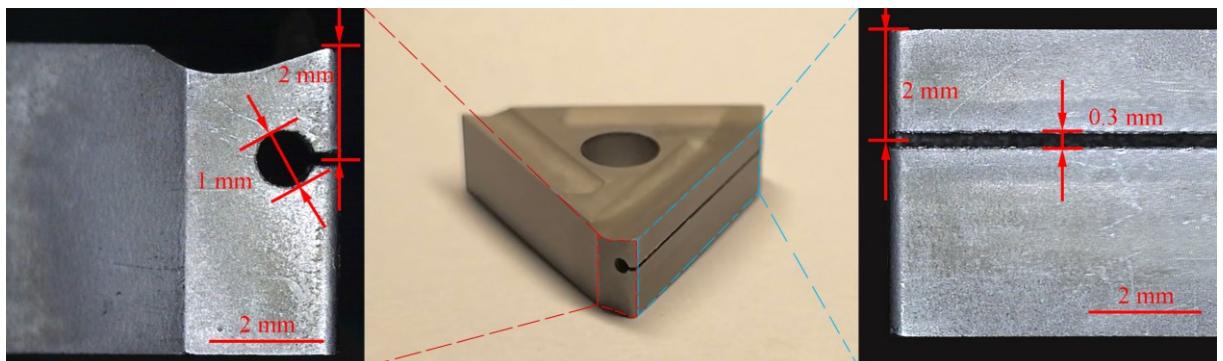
Illustration of thermocouple installation in the WC-8Co cutting tool
